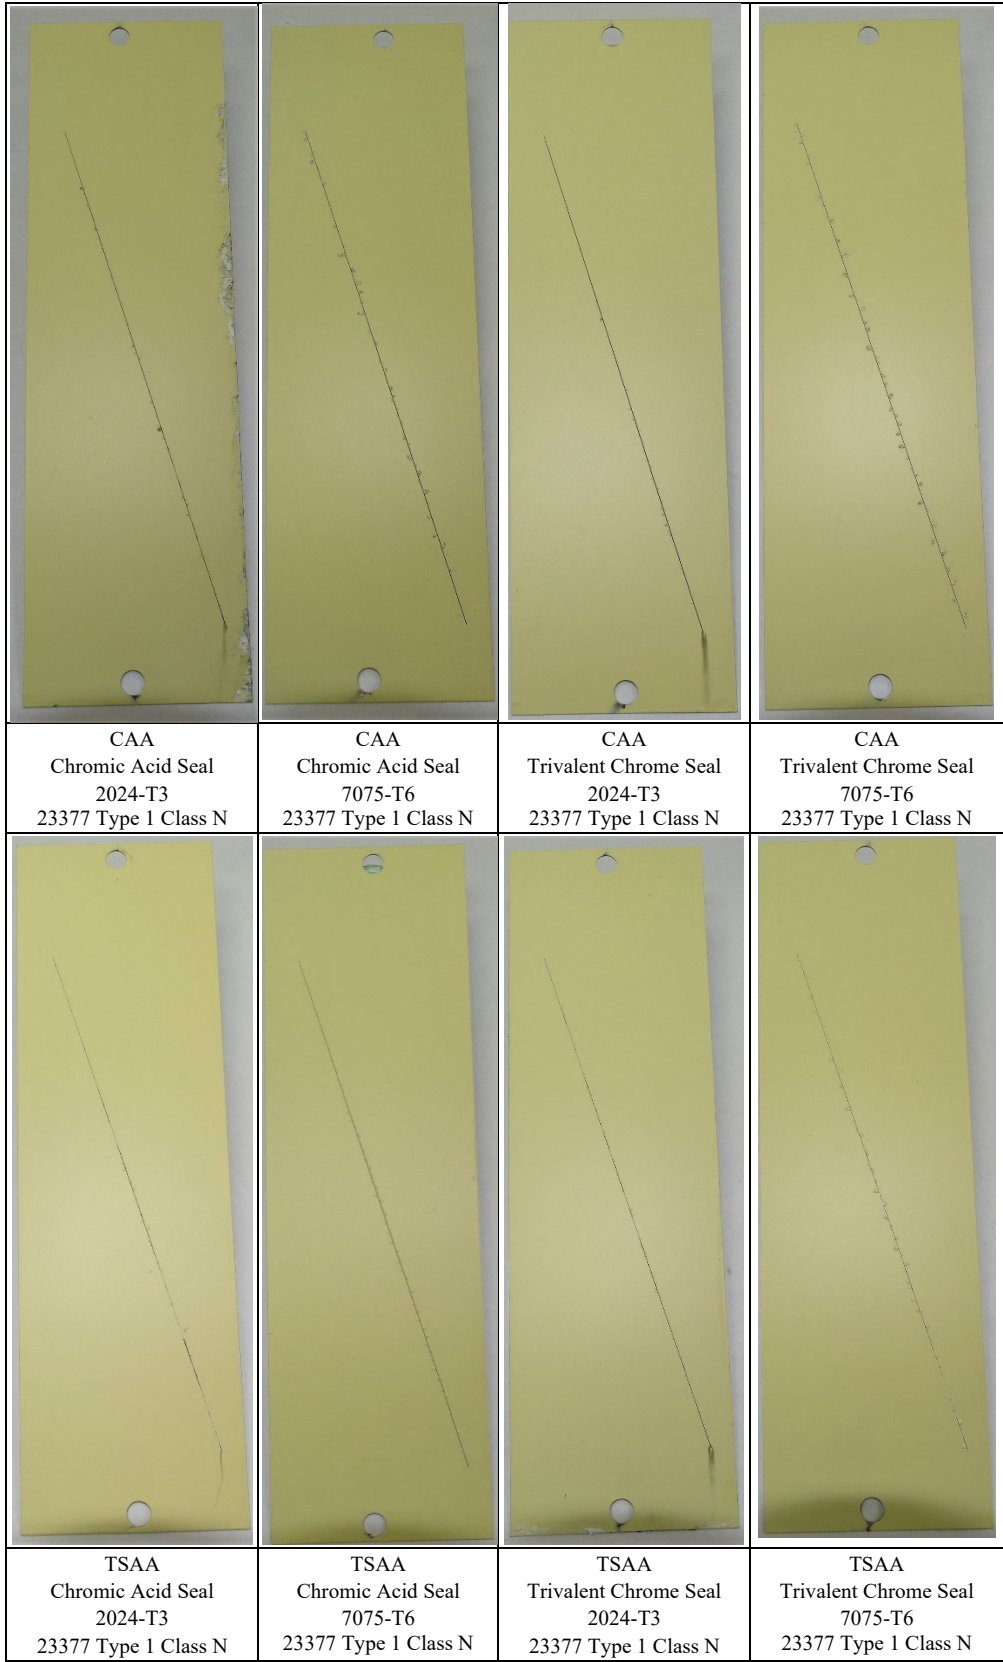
Examples of primed panels following corrosion-resistance testing (ASTM G85-02⁸)
